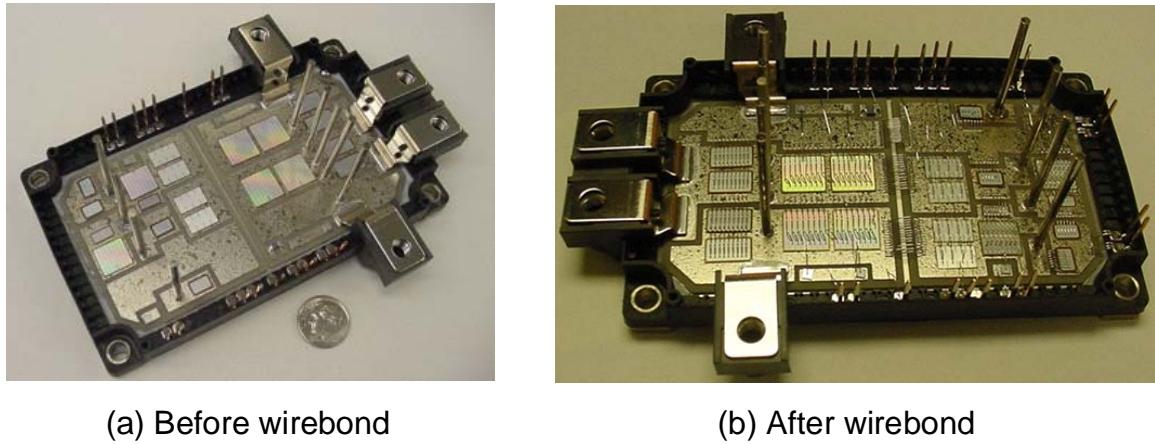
Photographs of Gen-2 soft-switching module layout: (a) before wirebond, (b) after wirebond.
